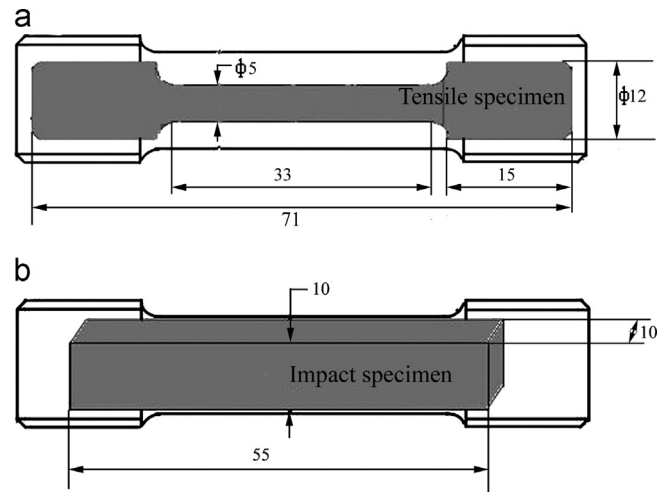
(a) The aged tensile specimen. (b) The aged impact specimen. Shaded geometries are the test specimens cut from the DSA treated specimen blanks.
